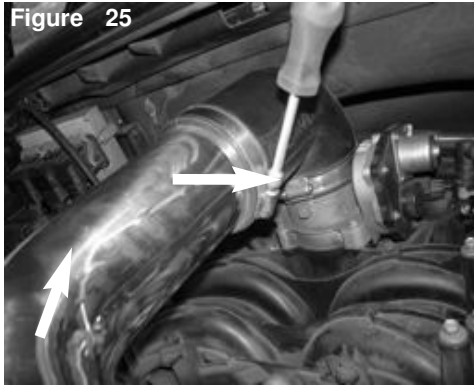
Tighten the clamps on the elbow using 8mm nut driver.
